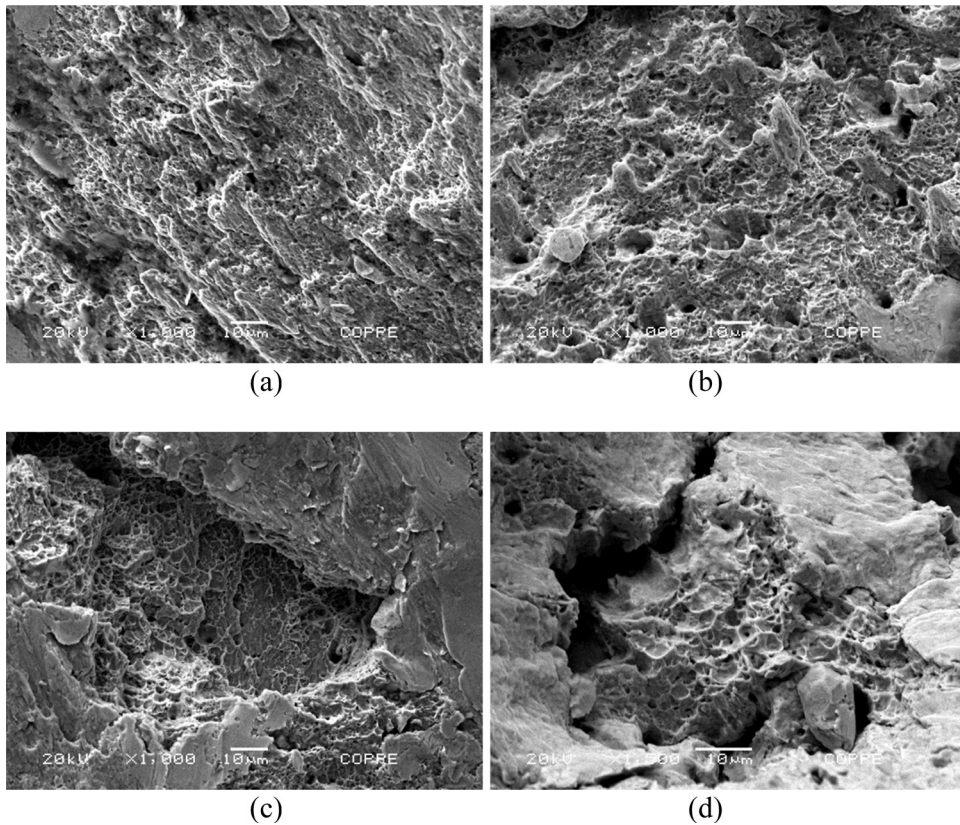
Fracture morphology: (a) close to the edge; (b) at a quarter-radius from the edge; (c) at mid-radius; (d) at the center of the fracture surface.
